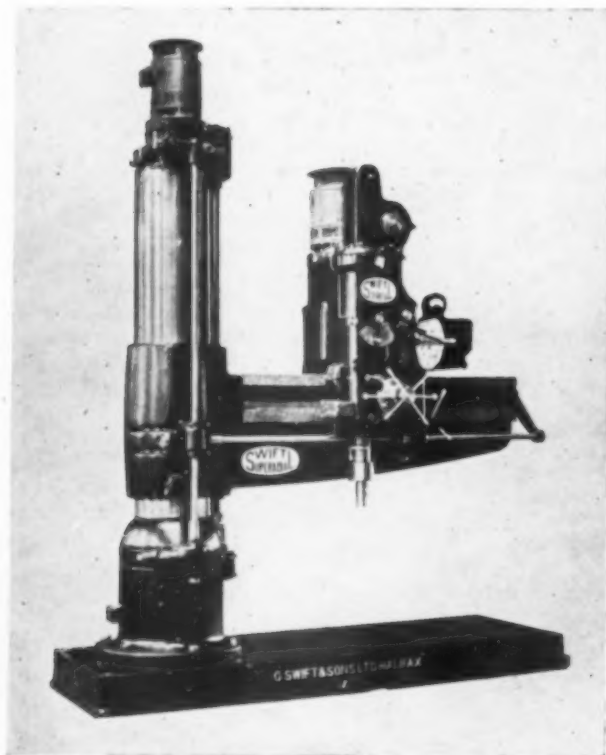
Drilling machine fitted with B.T.H. vertical spindle motor.
